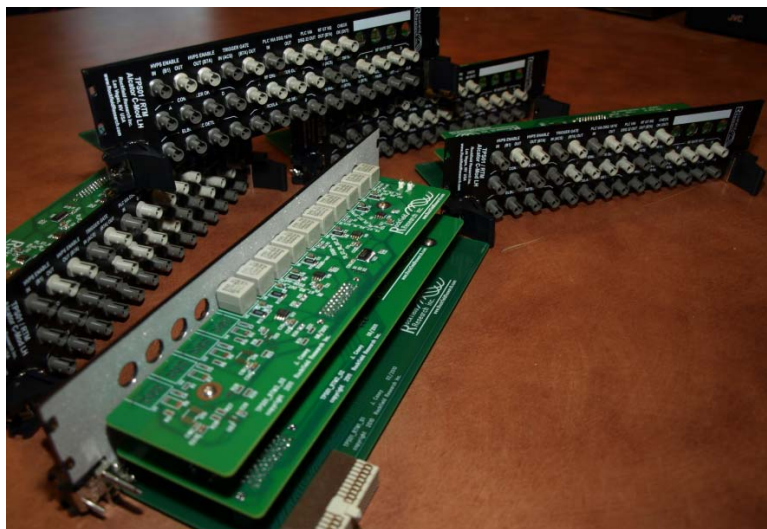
Five of the six three-board RTM assemblies manufactured are shown above. The lowest of the three boards mates to the cPCI backplane, as well as mounting board-to-board connectors to the other two boards. The panel hosts 42 fiber-optic I/O channels.
